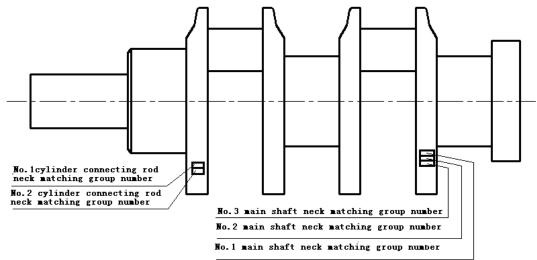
Connecting rod neck, main shaft neck matching group number Connecting rot neck and main shaft neck matching group number is in the table below: Main shaft neck matching group
